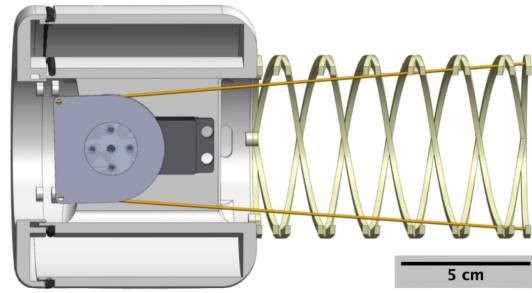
Top view of electronics housing and wave spring tail CAD. The body is toroidal in shape to provide a dry compartment for electronics while maintaining a slim cylindrical body profile and a channel for water to pass through the robot.
